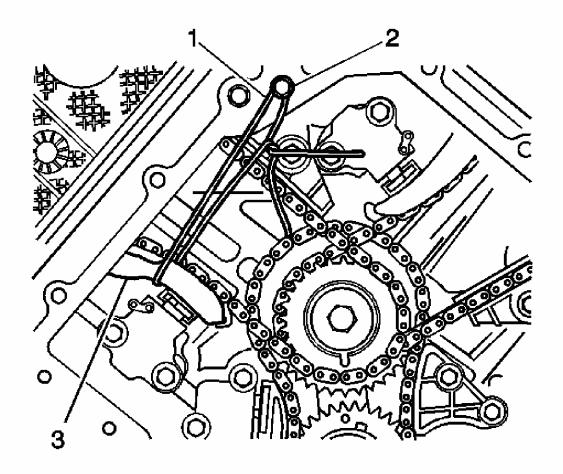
View Of Mechanics Wire, Right Secondary Camshaft Drive Chain Shoe & Front Cover Bolt Courtesy of GENERAL MOTORS CORP.
